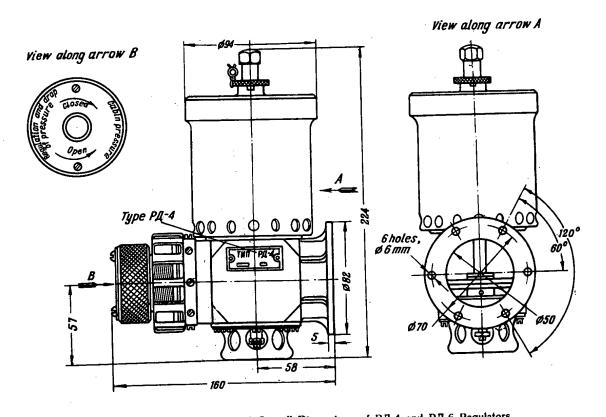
Installation and Overall Dimensions of РД-4 and РД-6 Regulators
